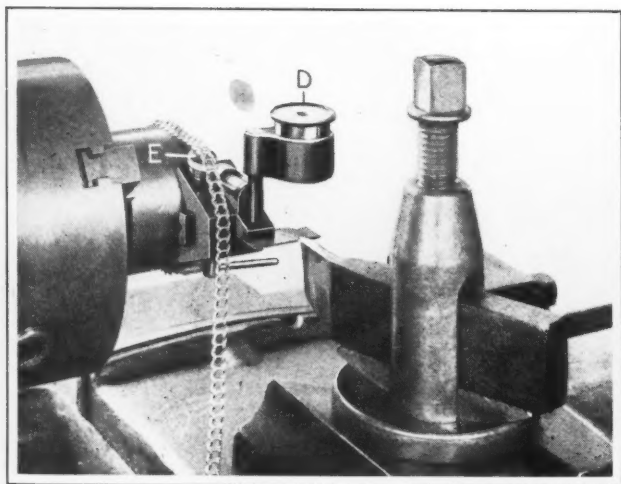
Application of the Optical Thread Tool Gage to Work of Comparatively Large Diameter
